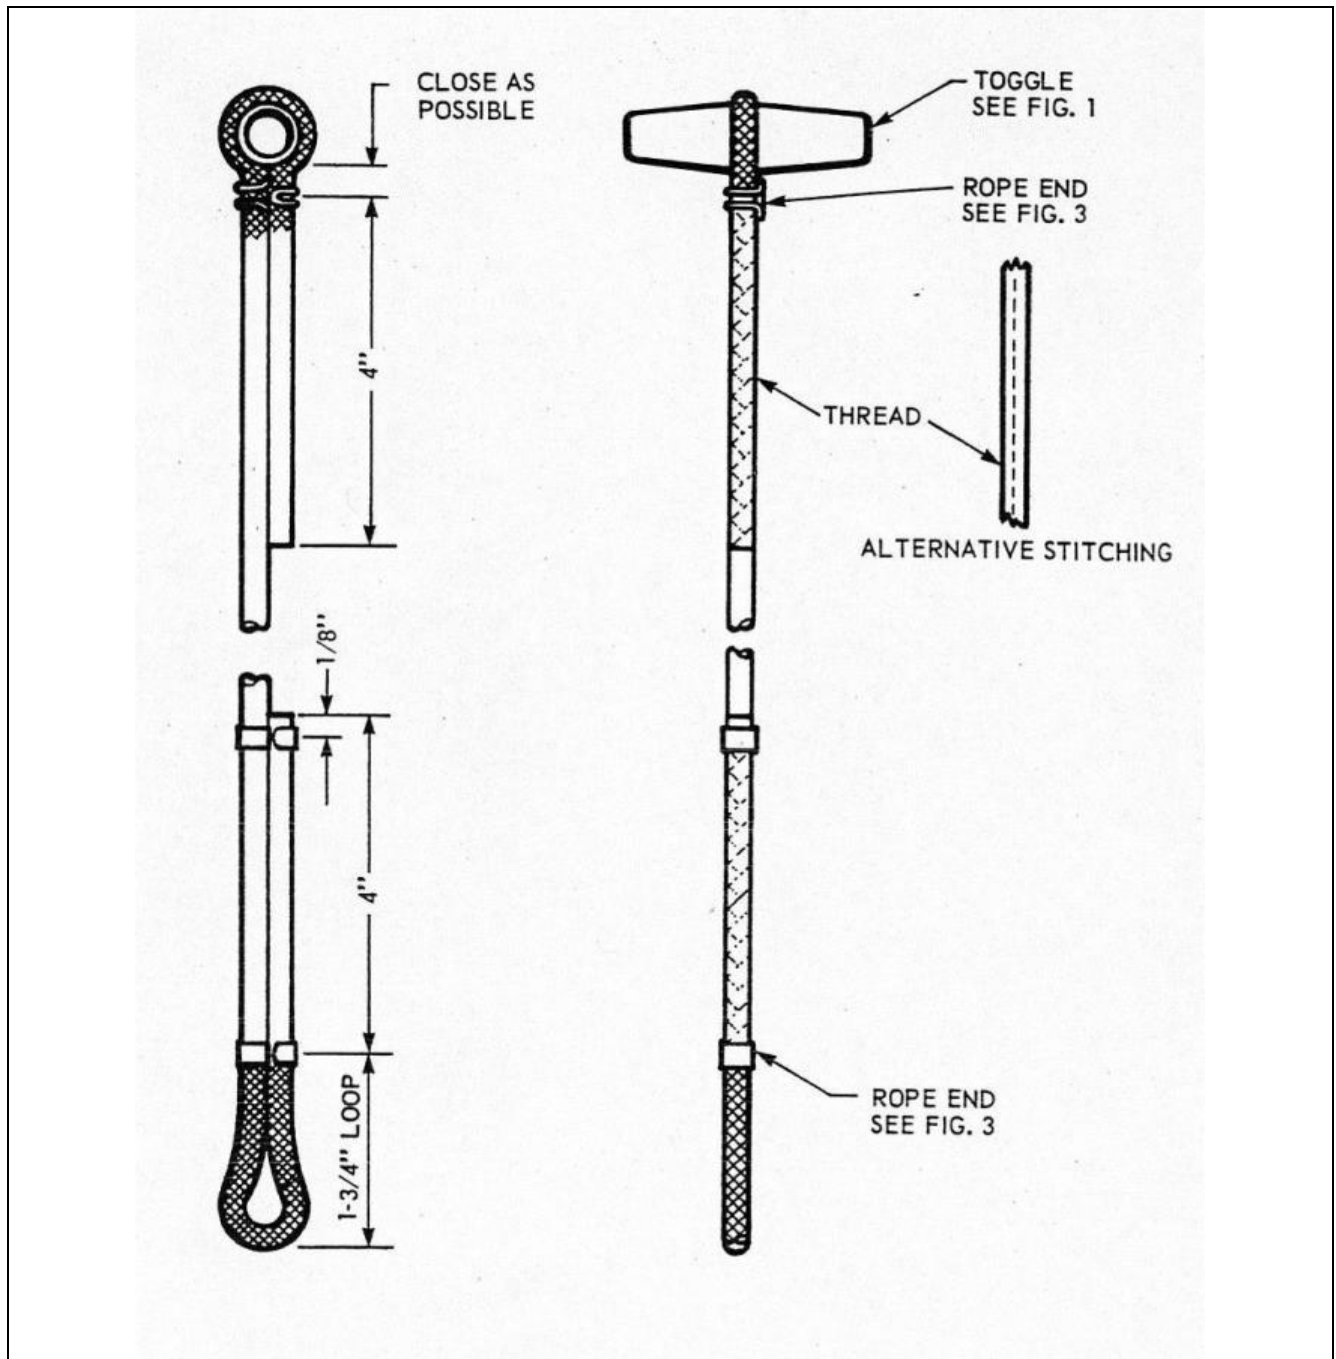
Rope and Toggle Assembly / Figure 10. Assemblage corde et cabillot
